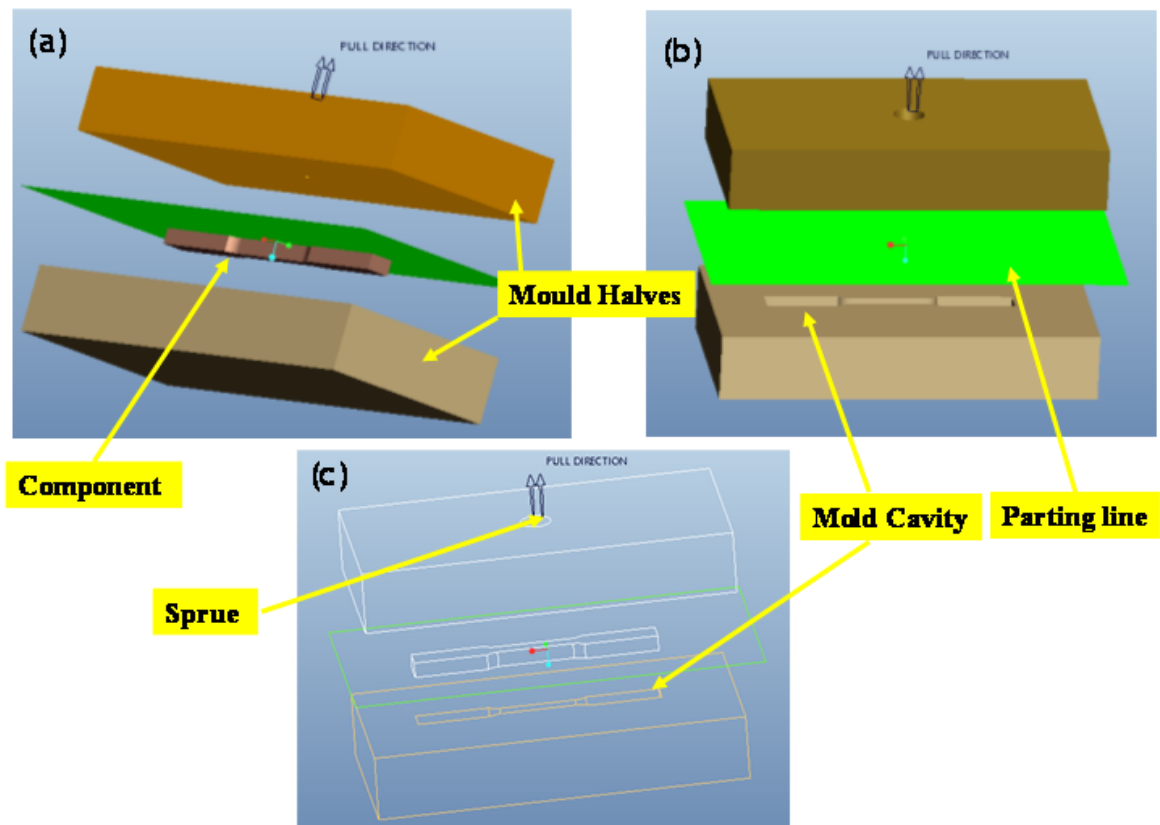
Injection mould inserts with a) Reference part & parting Surface b) cavity, c) wireframe model of the core cavity
